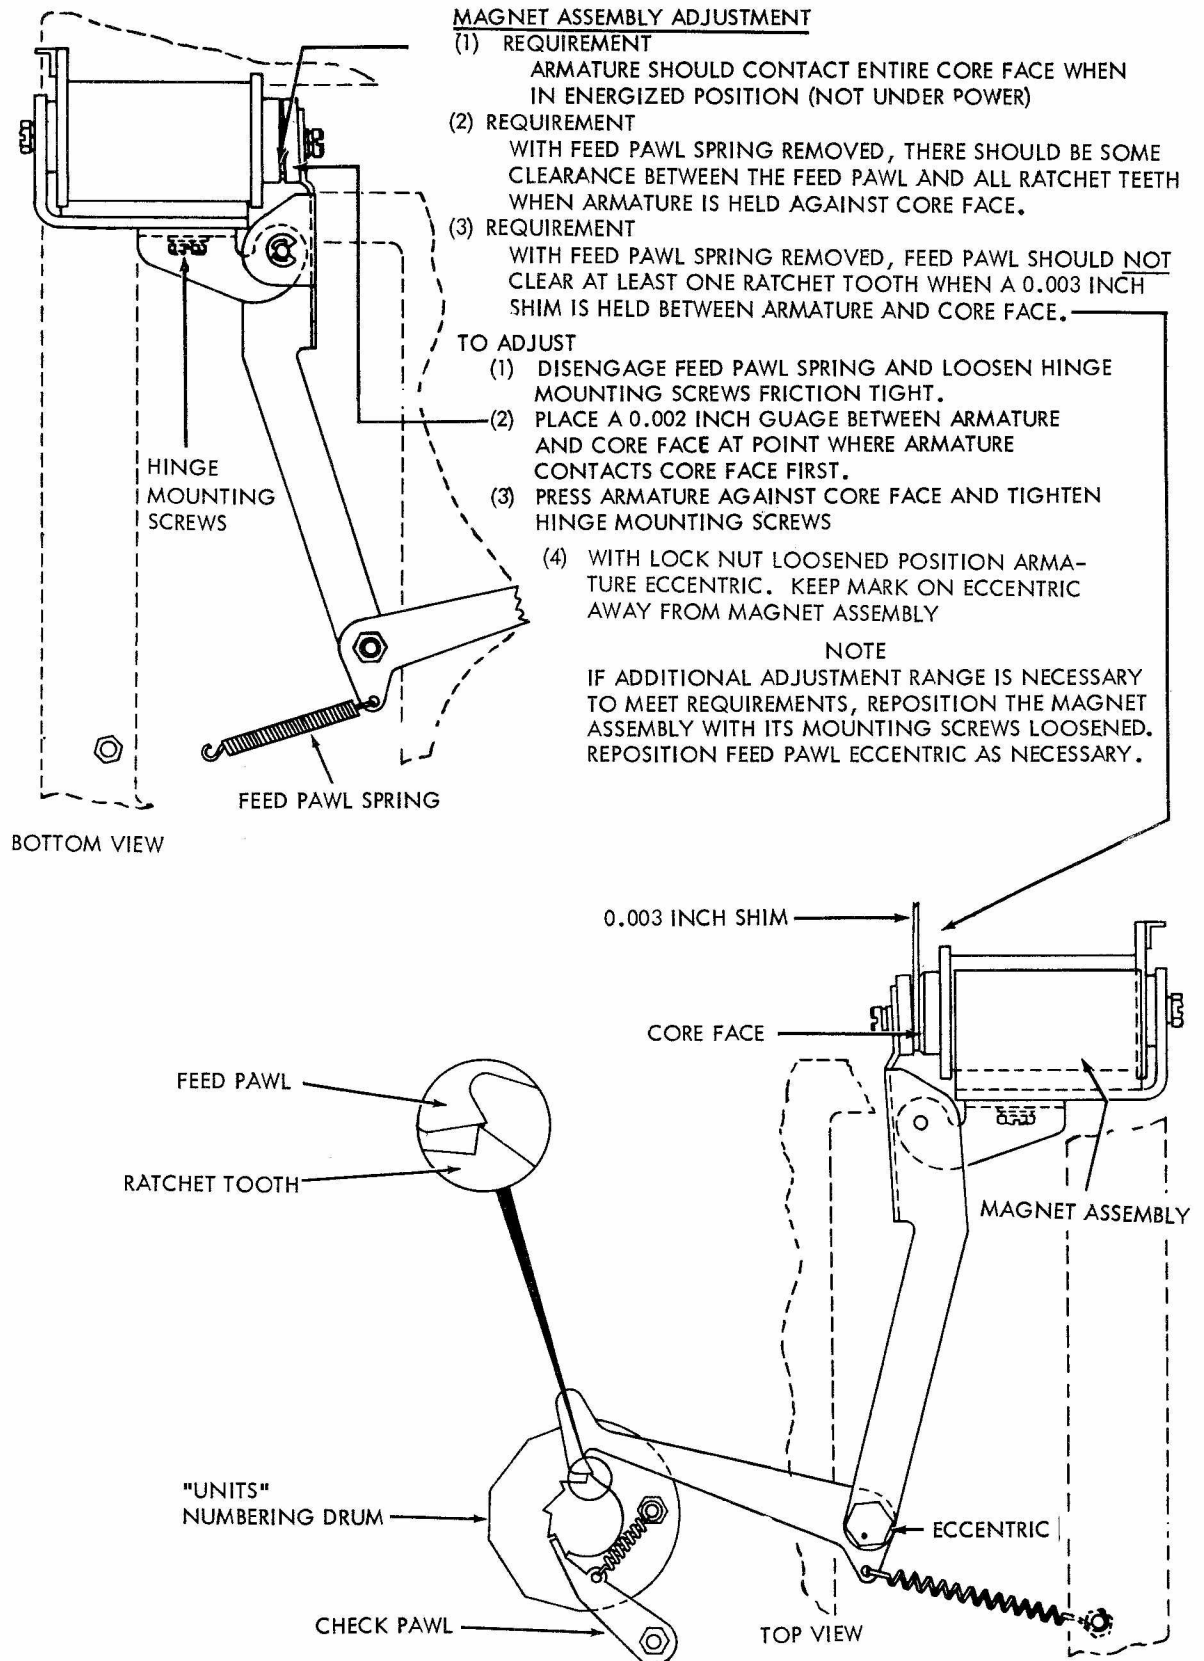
Tandem Message Identification Module, Magnet Assembly
